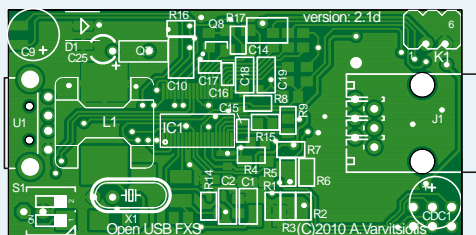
Component mounting plan of the VoIP adapter board. The bare board is available from Elektor.
